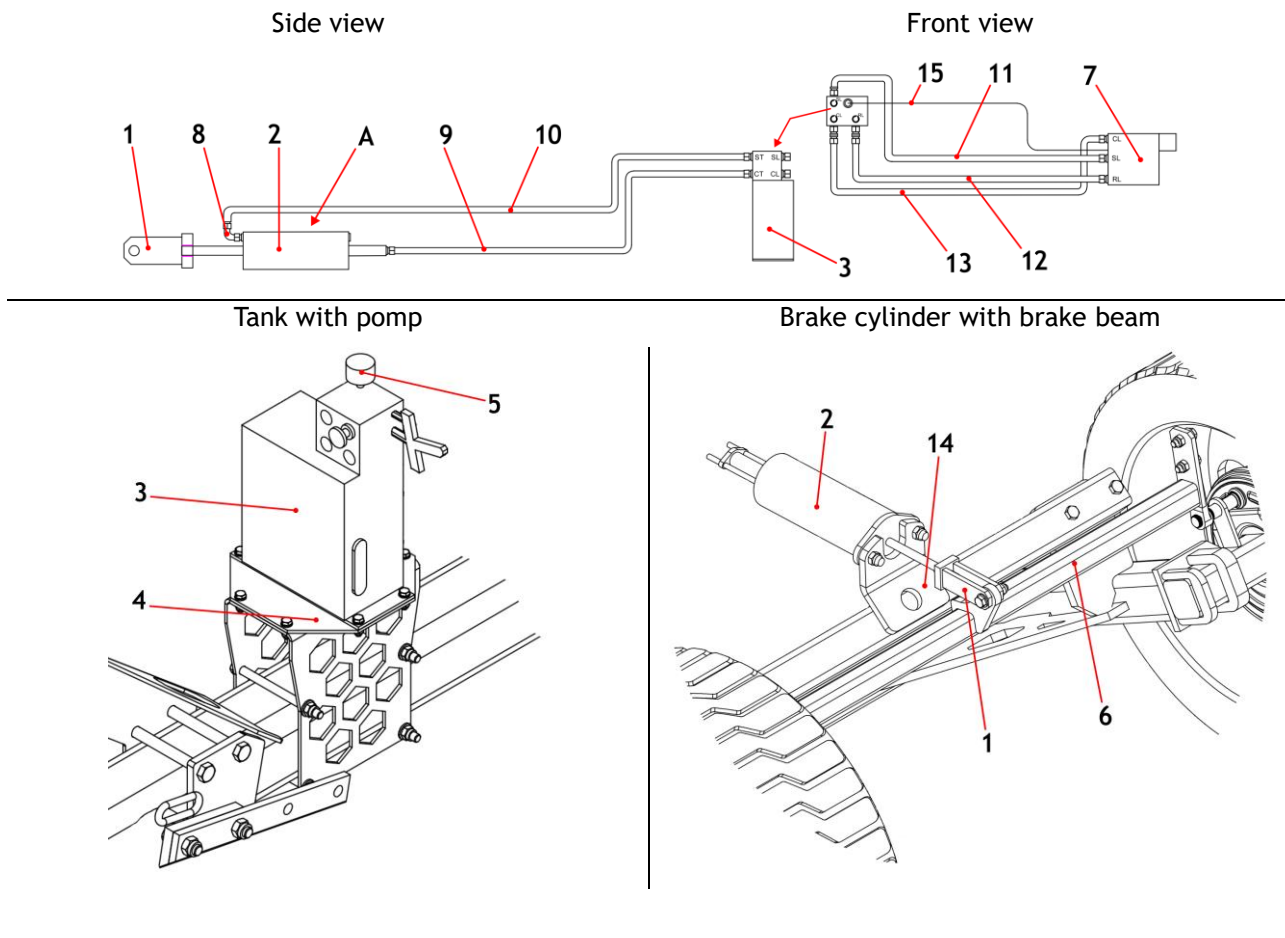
Diagram of the dual-circuit hydraulic brake of the MCB SWING roller (1 - hydraulic cylinder mount for brake beam, 2 - brake hydraulic cylinder, 3 - valve with pump reservoir, 4 - bolted tank base mounted on the drawbar, 5 - pressure gauge, 6 - brake beam, 7 - DLC-duble-circuit coupling with cable, 8 - elbow connector, 9,10,11,12,13 - hydraulic line, 14 - hydraulic actuator mounting plate, 15 - cord)
